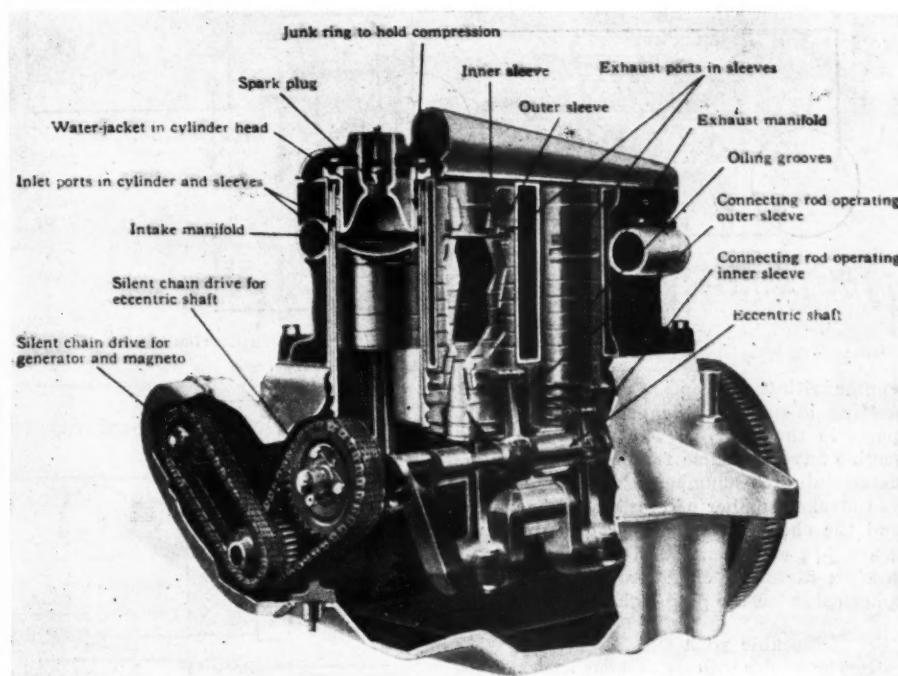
Cutaway view of the Knight sleeve-valve engine used in the Willys-Knight. The sleeve valve action is shown clearly
